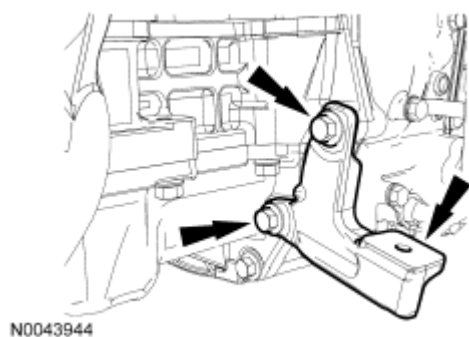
Locating Front Catalytic Converter Bracket Bolts
